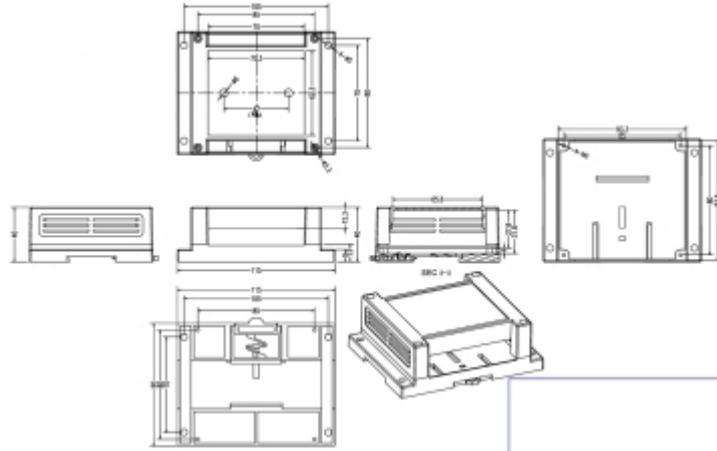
MA01-AXCX4040-V2/MA01-AXCX4040-V2P Dimensional Drawing
